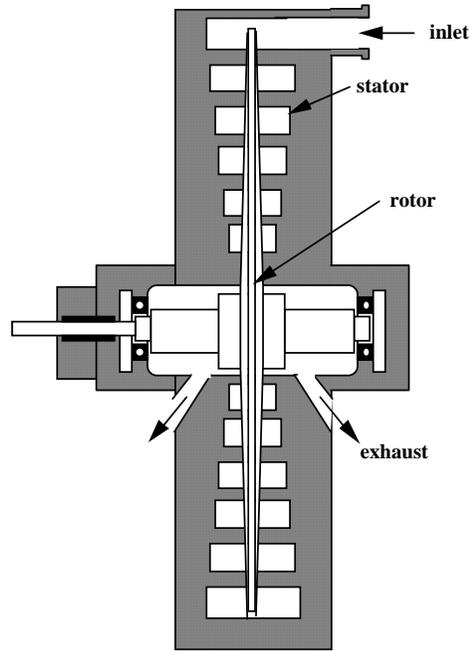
Cross-section of a molecular drag pump using a spiral channel machined into the stator and a flared disc as a rotor.
